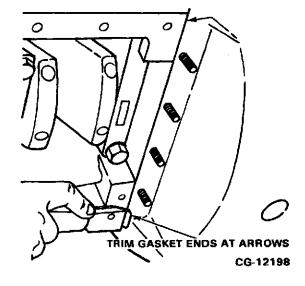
Remove Excess Flywheel Housing Gasket
